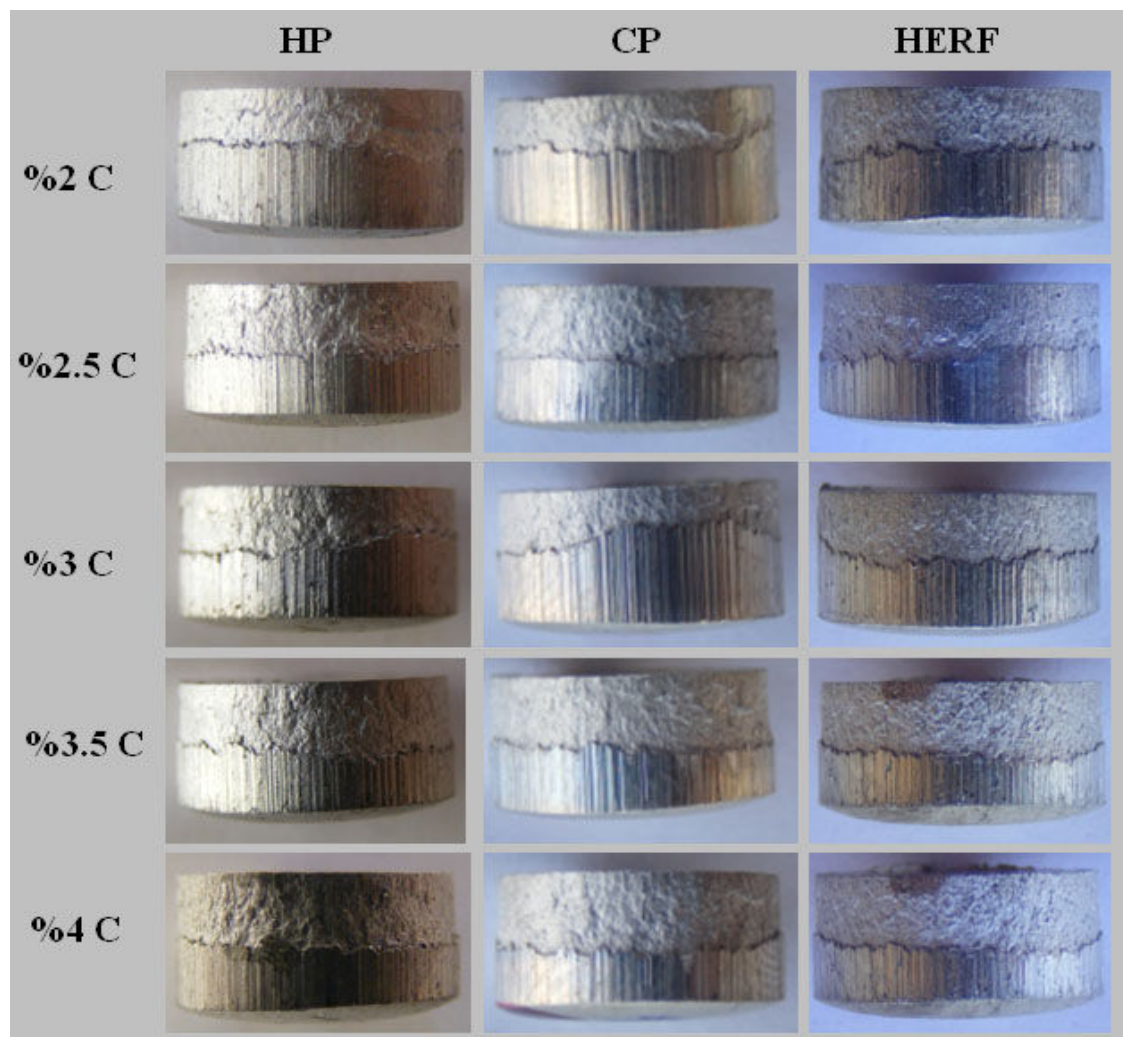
Shear and fracture surfaces of the aluminum materials according to the press type and die clearances
